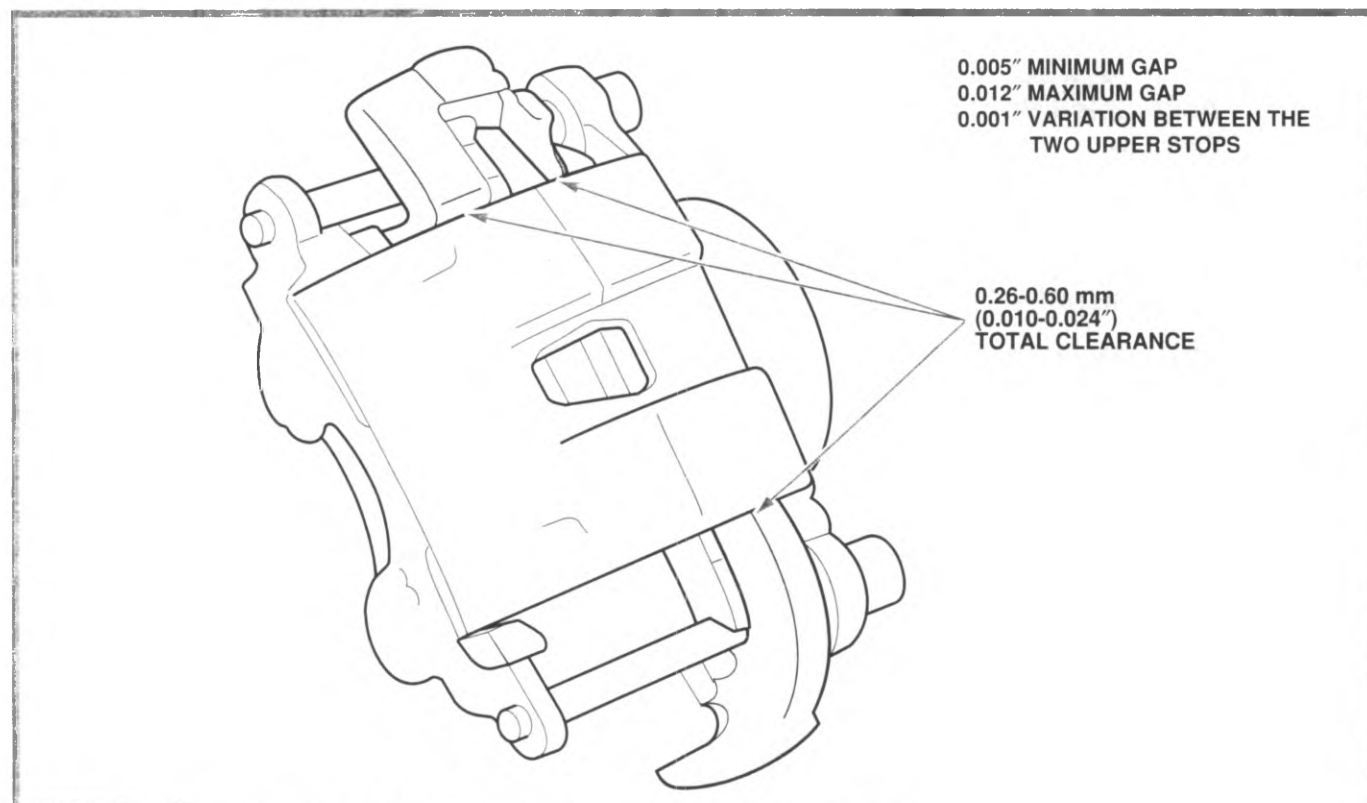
, Measuring Caliper and Mounting Bracket Wear
